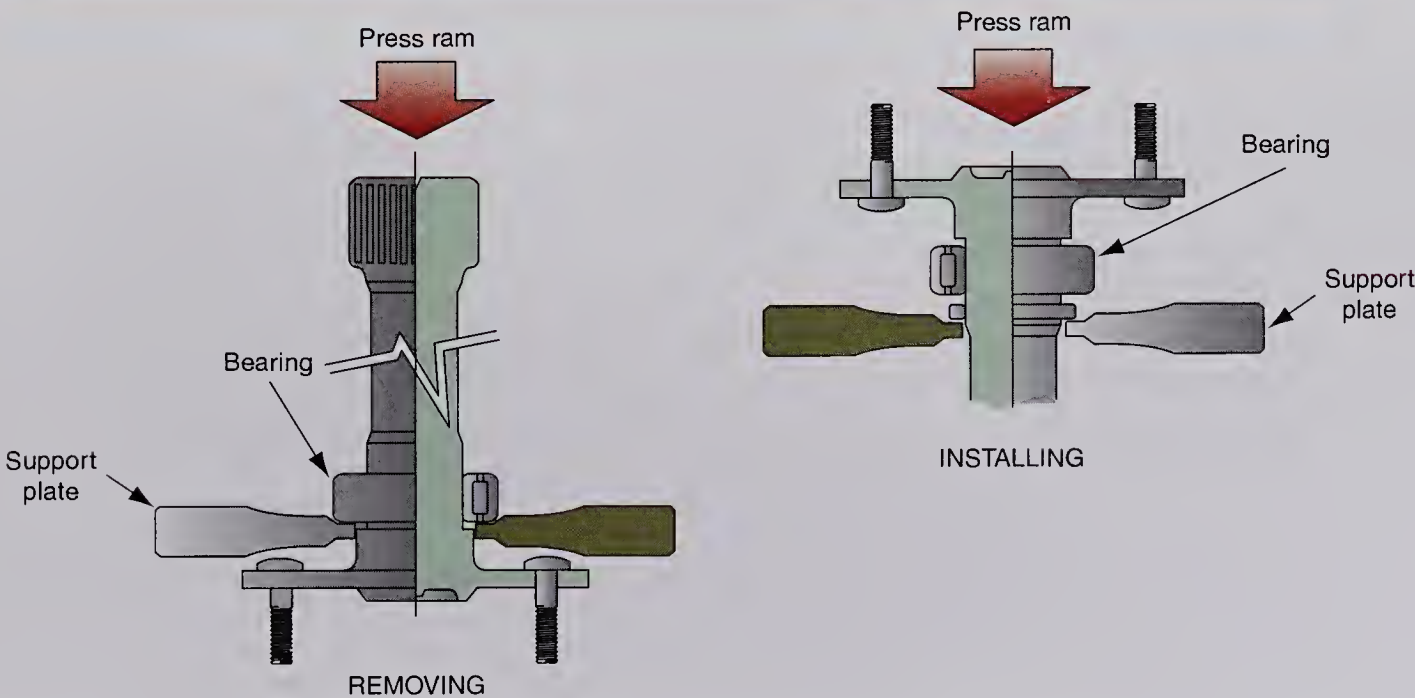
Axle bearing and adaptor ring removal and replacement.
